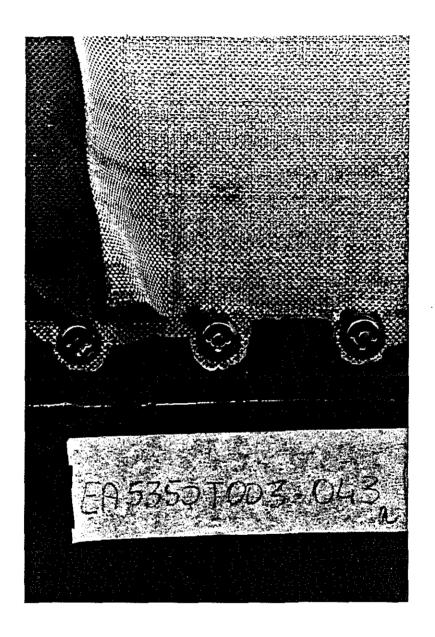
Joint analysis tests. Damage caused by the conduction of a 200 kA strike to a painted jointed panel protected with nickel coated fabric and jointed to a aluminium sheet with ten titanium blind rivets. The paint has been removed by the current.
